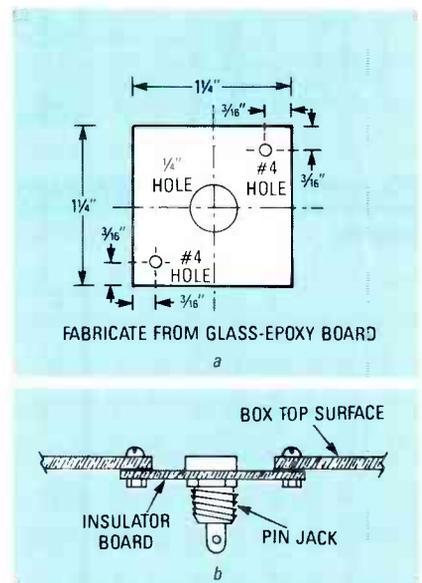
DETECTOR-ROD INSULATOR BOARD, showing (a) physical layout and (b) assembly into the case.
